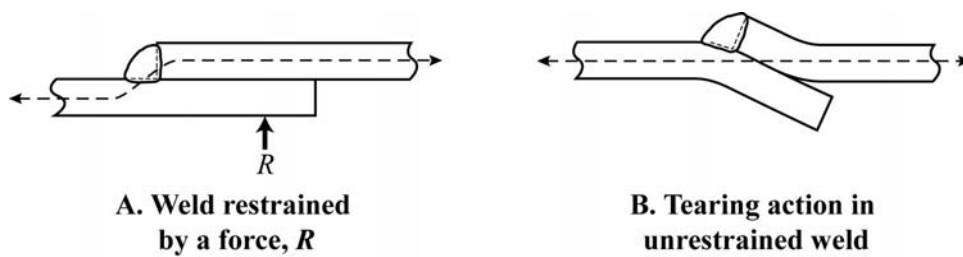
Single Fillet-Welded Lap Joints.
